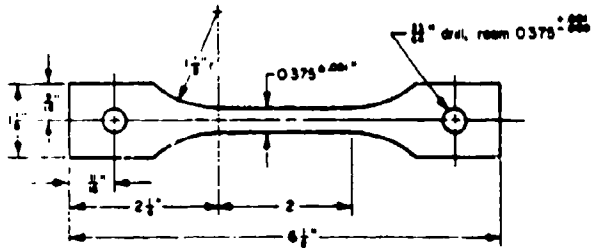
SHEET CREEP - AND STRESS- RUPTURE SPECIMEN
